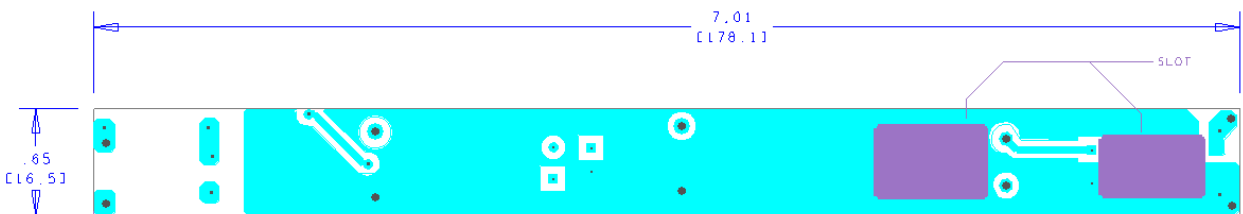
Printed Circuit Layout for D Package. Bottom View.
